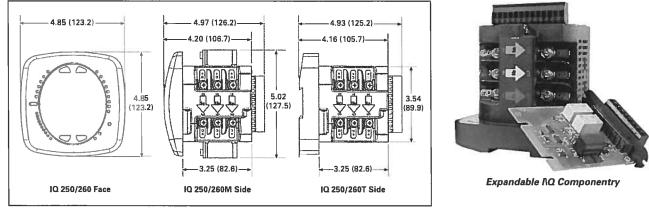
IQ 250/260 Meter Dimensions — Face and Side Views
